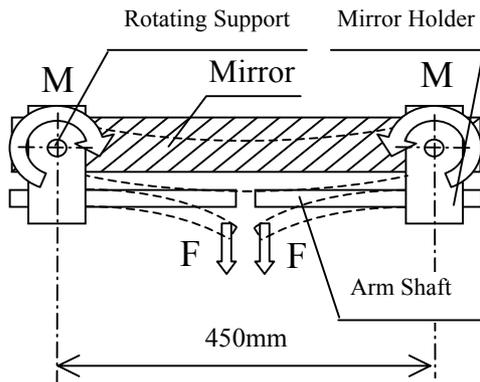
Principle of “Arm Method” mirror bending mechanism.
